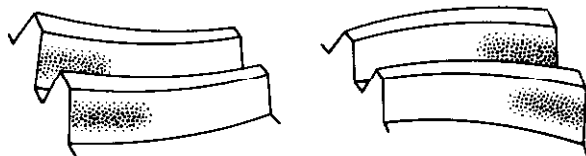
Heel Contact—To Correct Move Gear Toward Pinion
